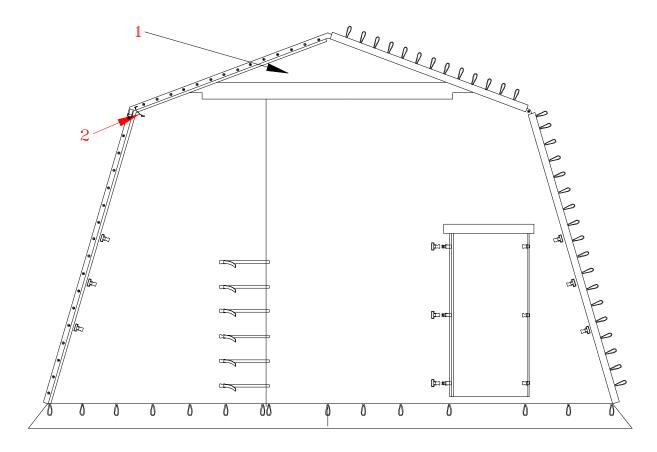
Fabric Assembly, End Panel (CMC-7895)
